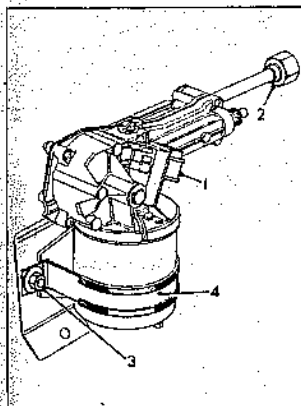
Headlamp wiper motor mounting (Sec 37)
